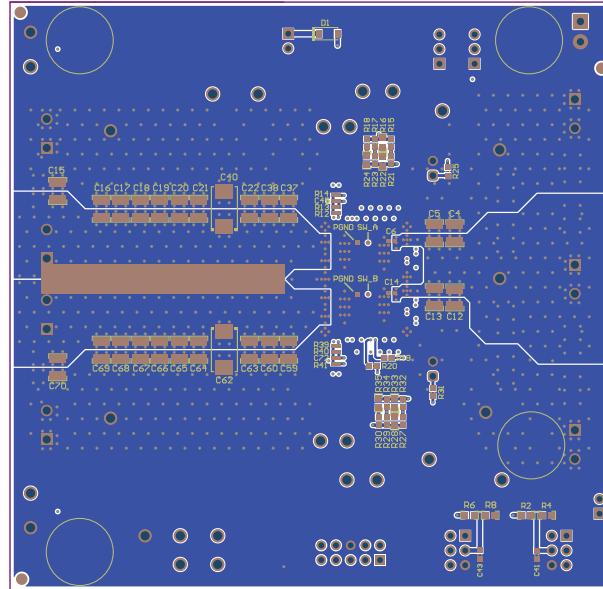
TPSM8D6B24EVM-2V0 Bottom Side Component View (Bottom View)
